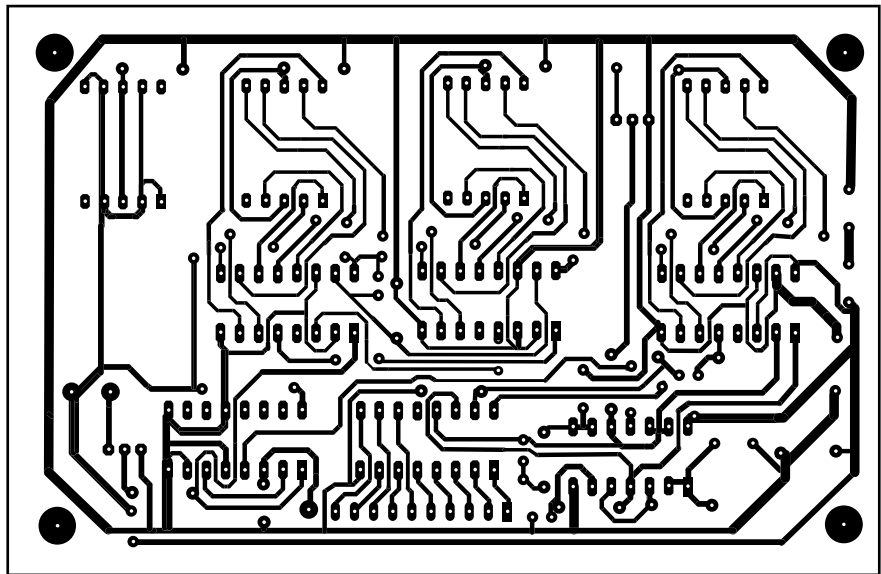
Actual-size, single-sided PCB layout for the circuit
